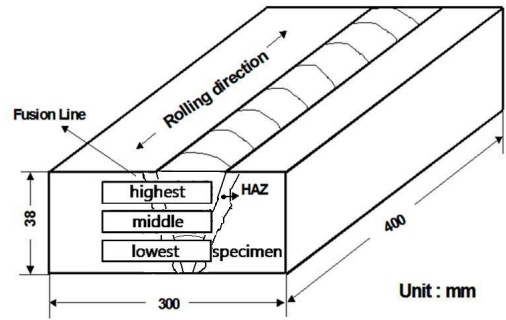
Weld block and extraction locations of PWHT specimens
